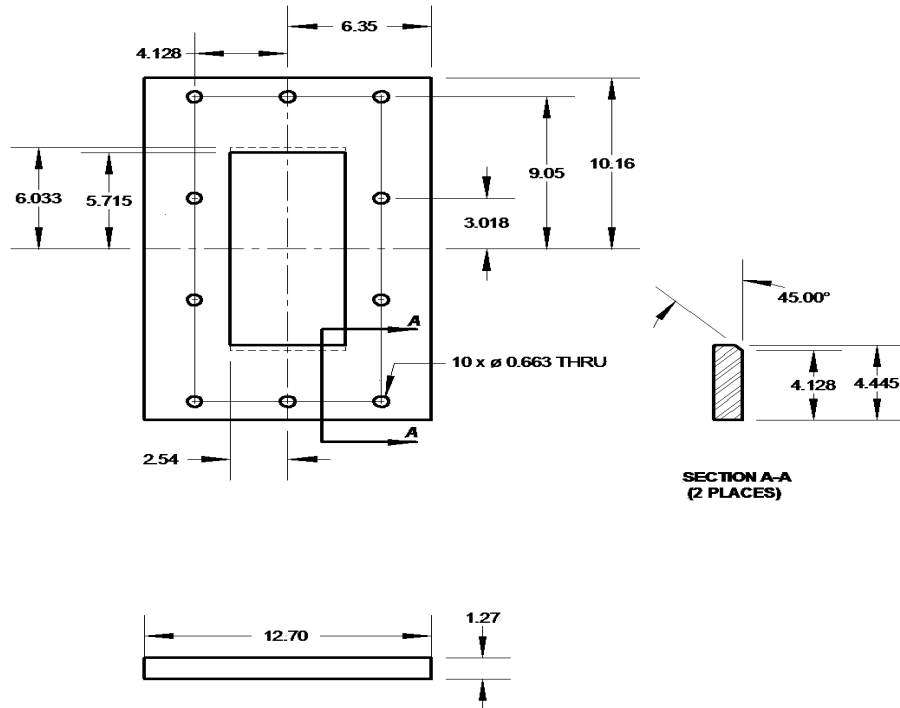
Autosketch Drawing of Beam Fixture Top Plate [28]
